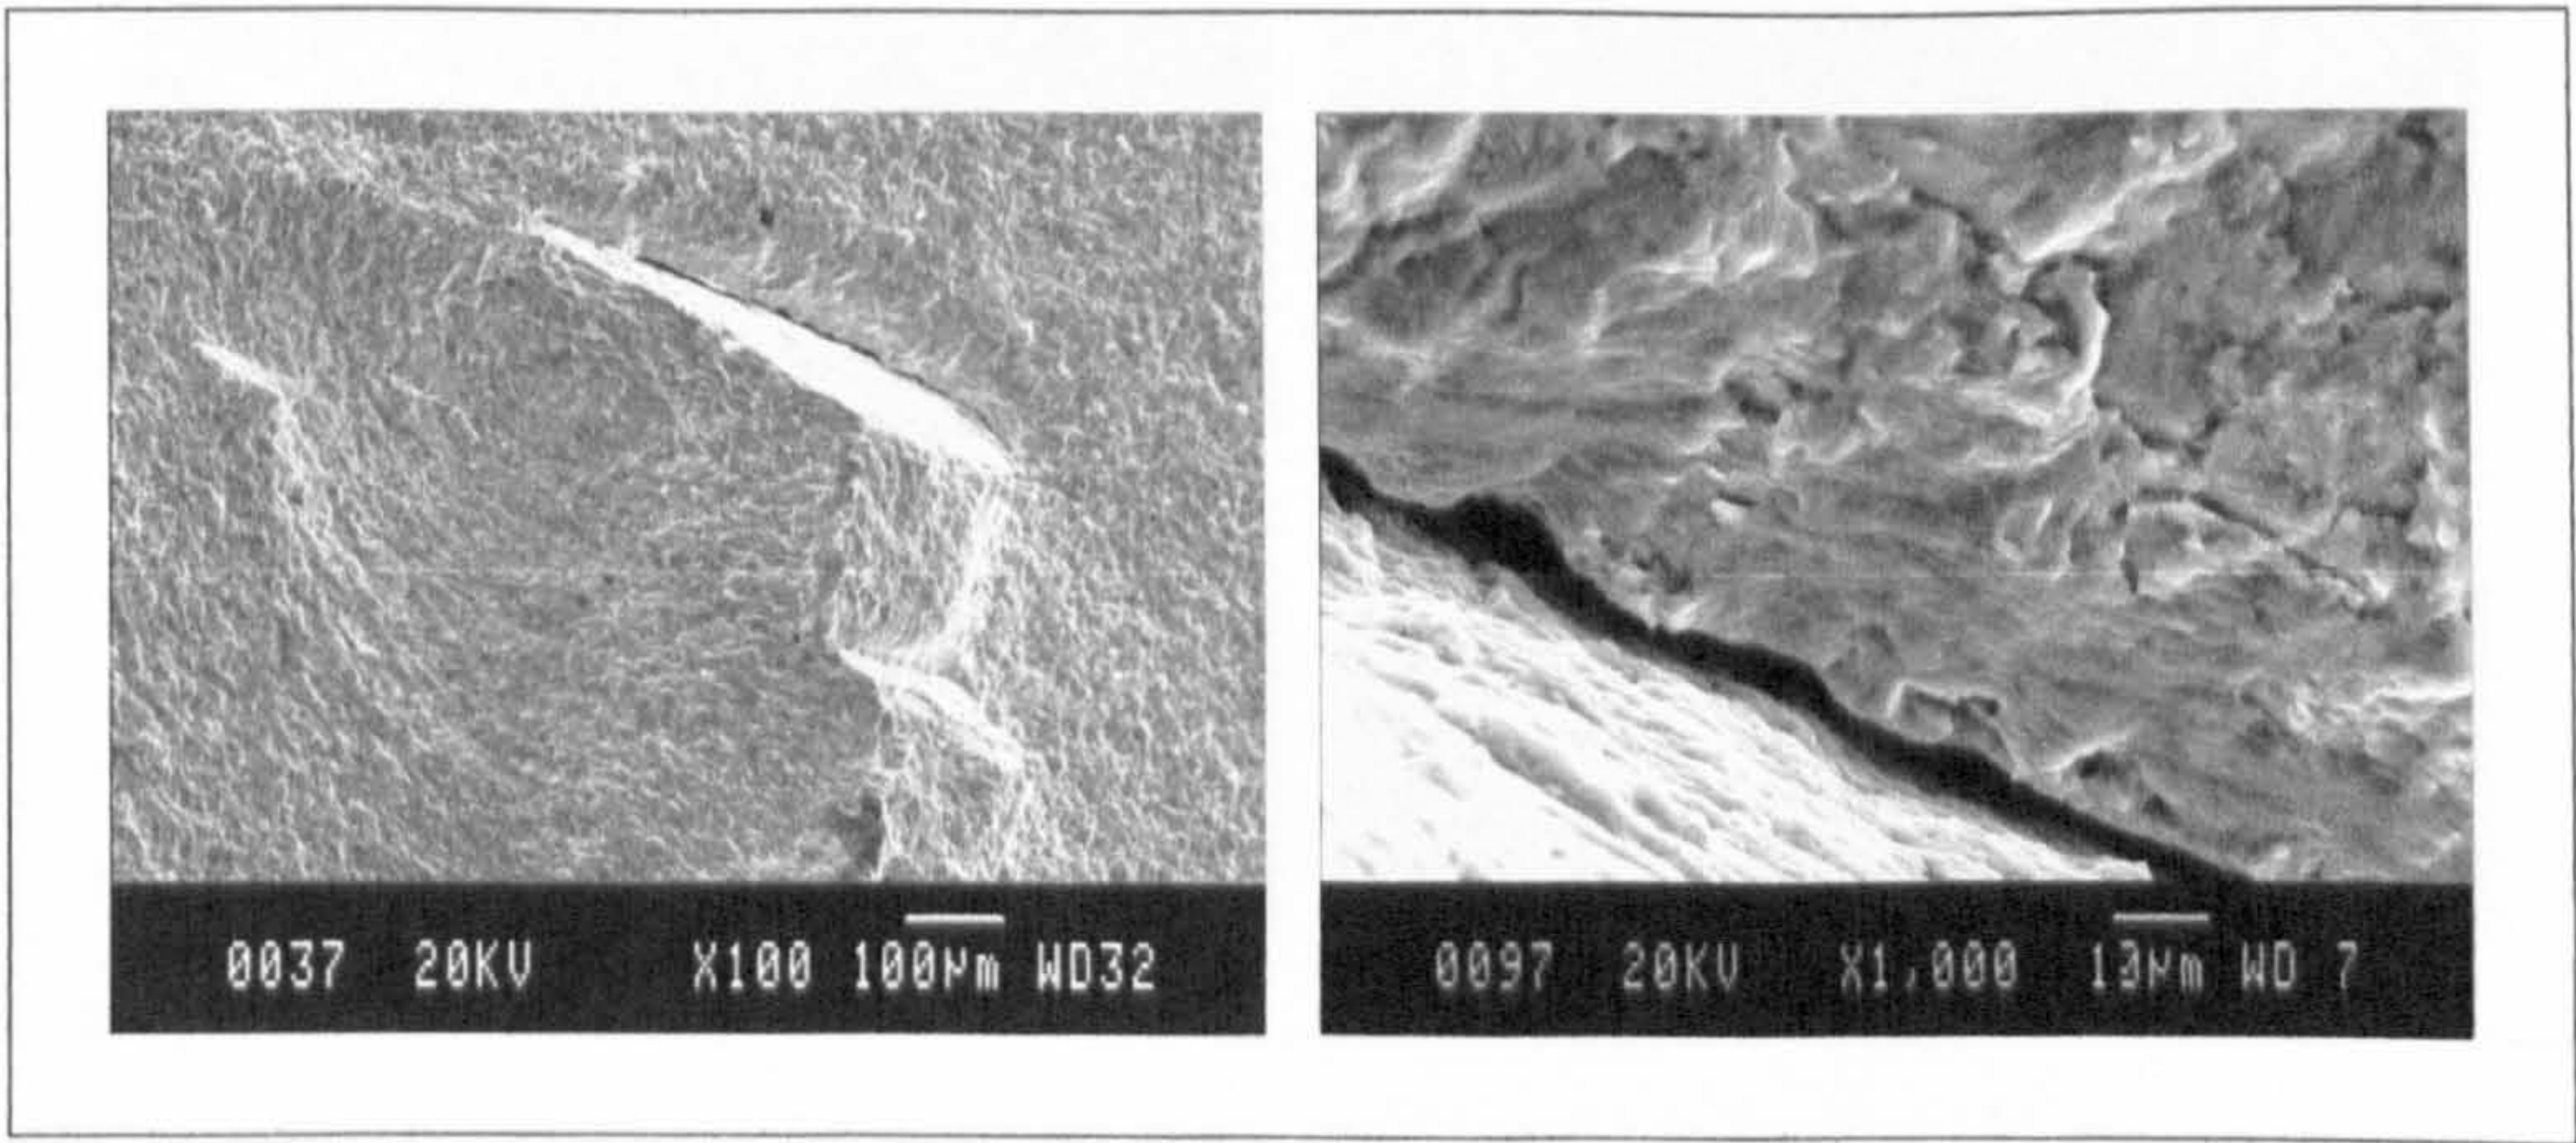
PFD on fatigue fracture surface (left & right), possible initiation site for main crack, (FS SP 3).
